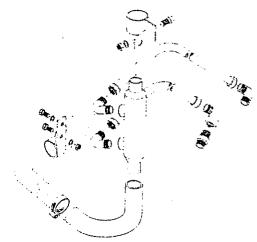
Oil Cooler, Warner Gear and Vee Drive
